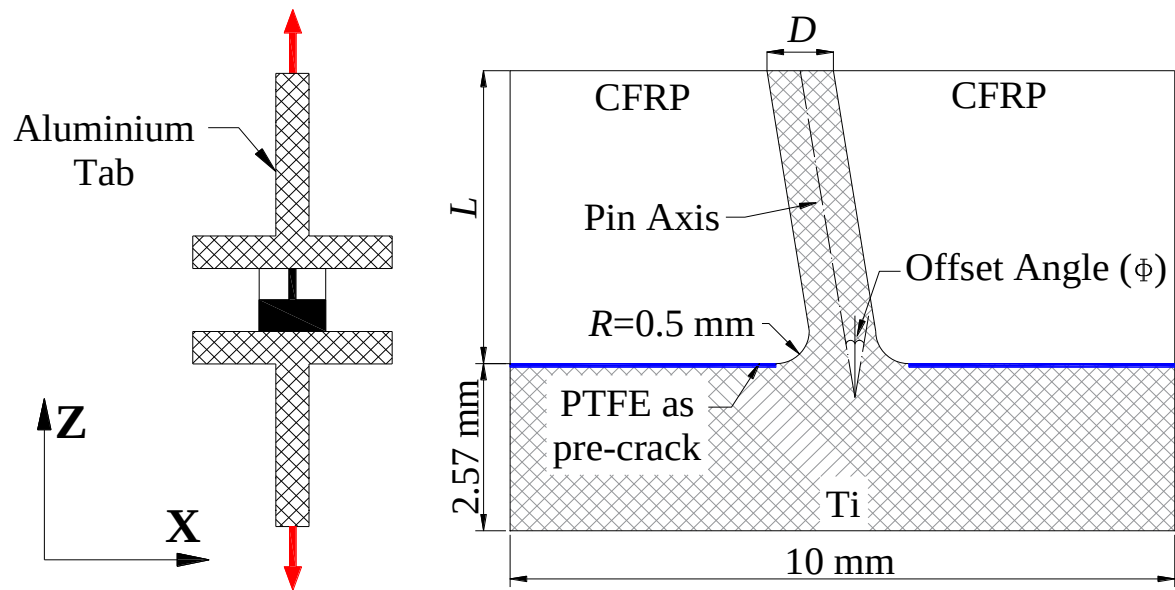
Pull-out test setup of a single pin specimen with detail cross-section schematic
